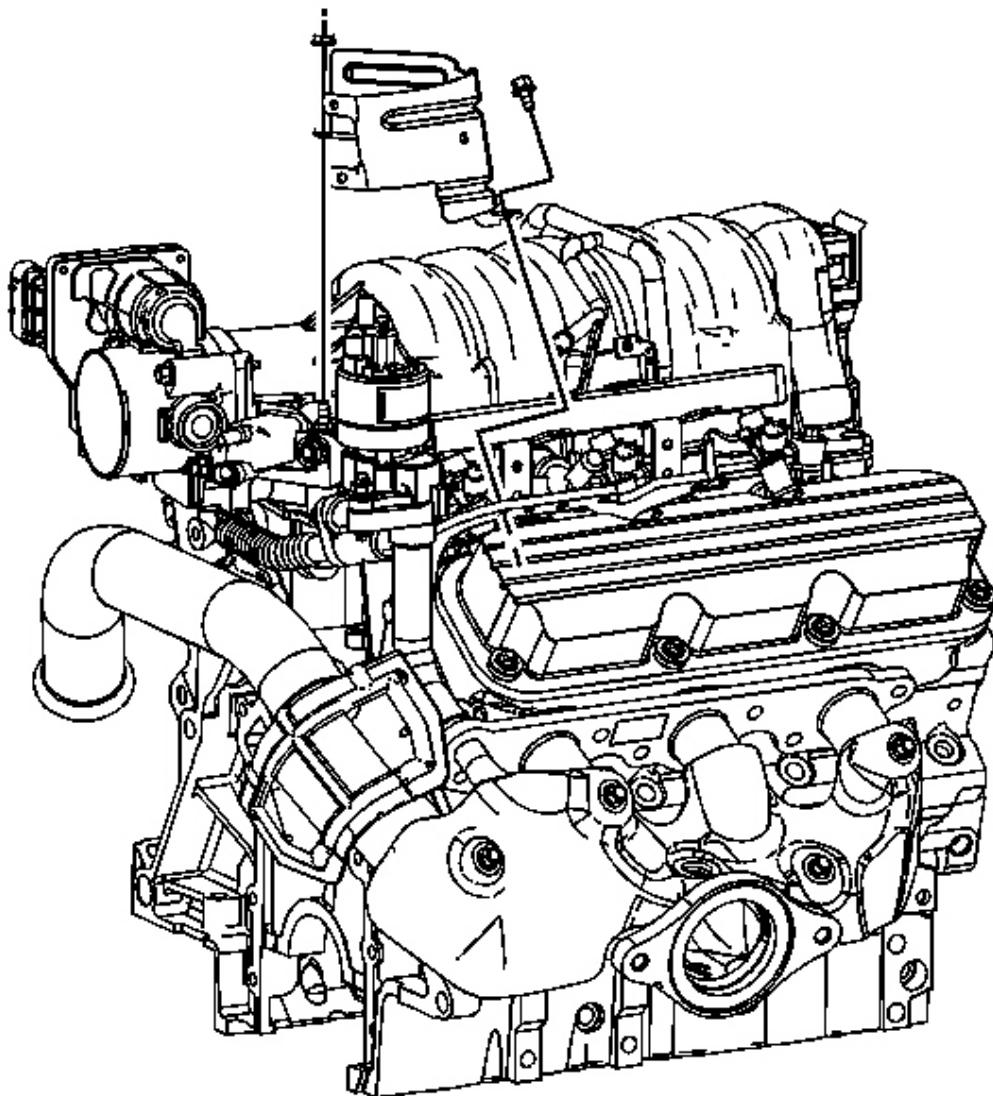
Locating Evaporative Emission (EVAP) Pipe Quick Connect Fitting
